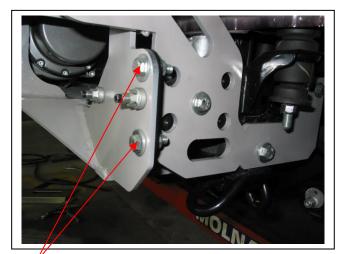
Shown levelling passenger side steel mounting bracket off front edge
